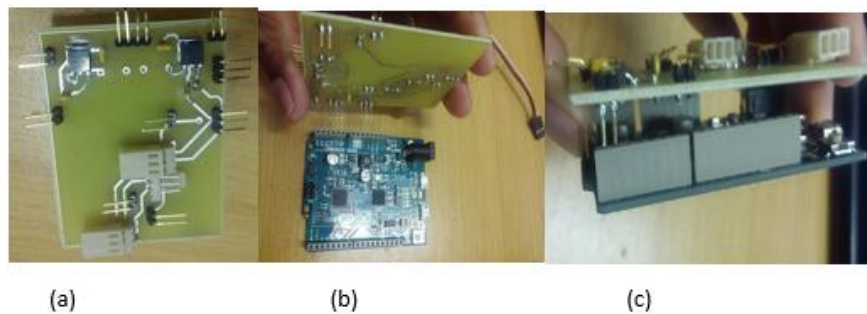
EMG amplifiers PCB (a) Top view (b) Bottom view (c) Connecting the PCB to arduino m0 pro
